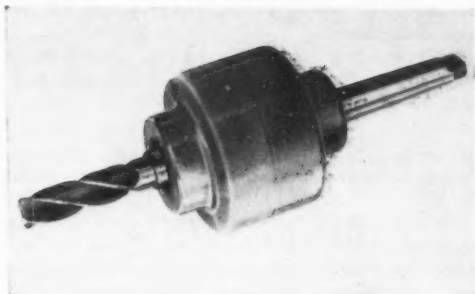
One of the New Clarkson True Size Spiral Reamers and an Aximatic Floating Holder
